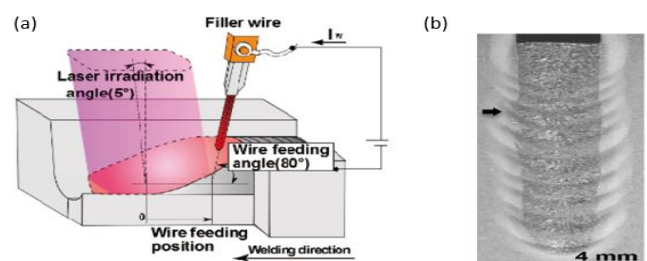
(a) Schematic illustration of narrow gap hot-wire laser welding (b) Cross-sectional macrostructure of weld fusion zone of pipe specimen [13]
